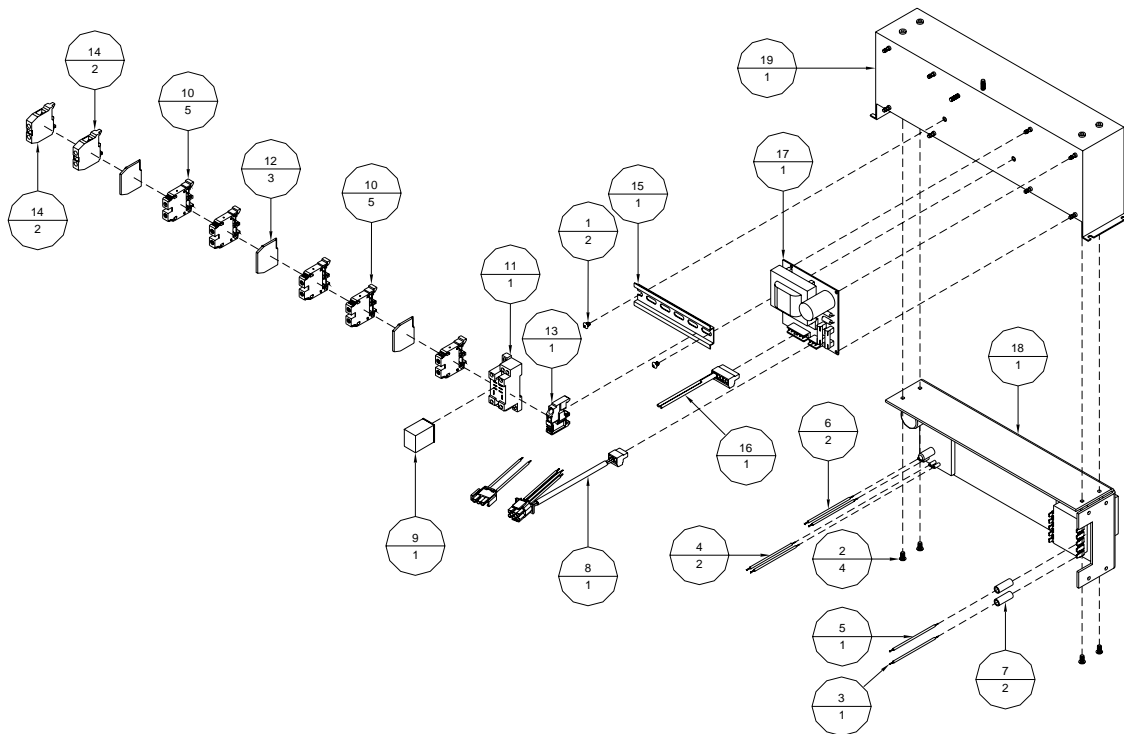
Power Supply Housing Assembly (9101209A)
